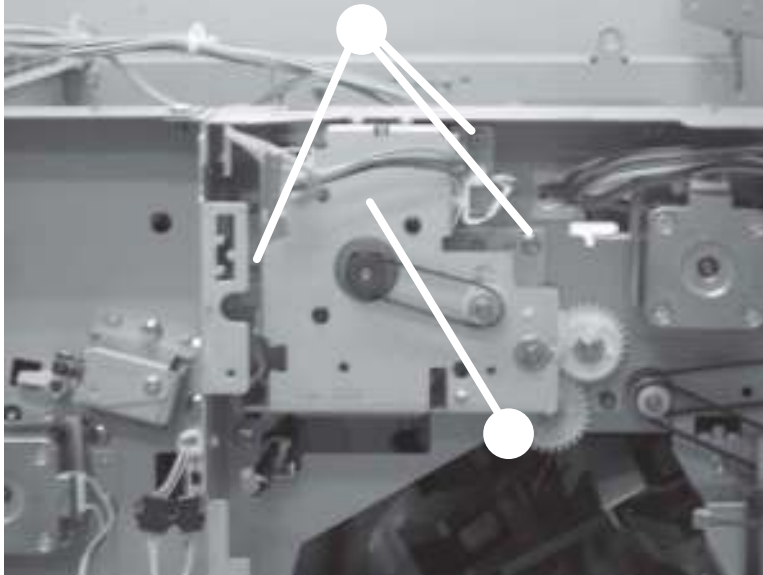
Remove the pressure roller assembly (1 of 8)
